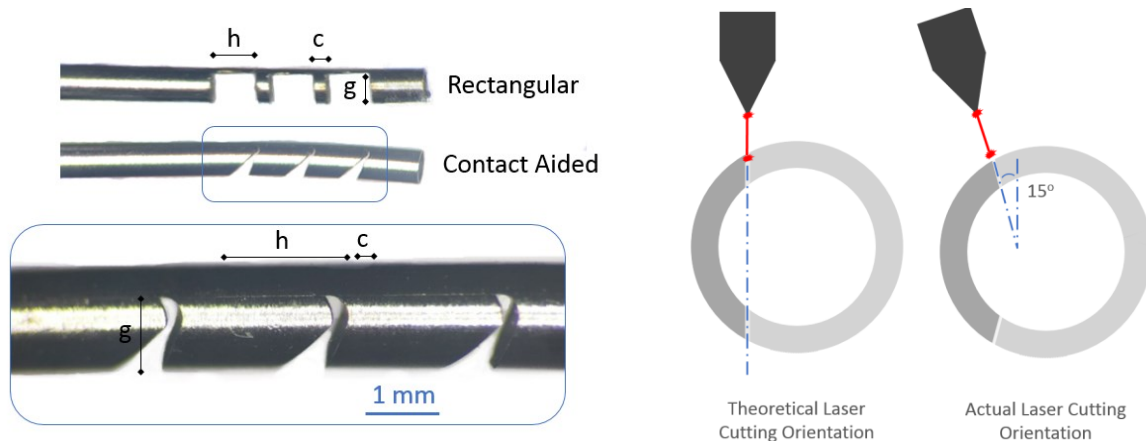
Comparison of Fabricated Rectangular Notch Joint and Joint with Contact-Aid (A). Schematic of Laser Cutting Orientation Used to Construct Test Specimen (B).
